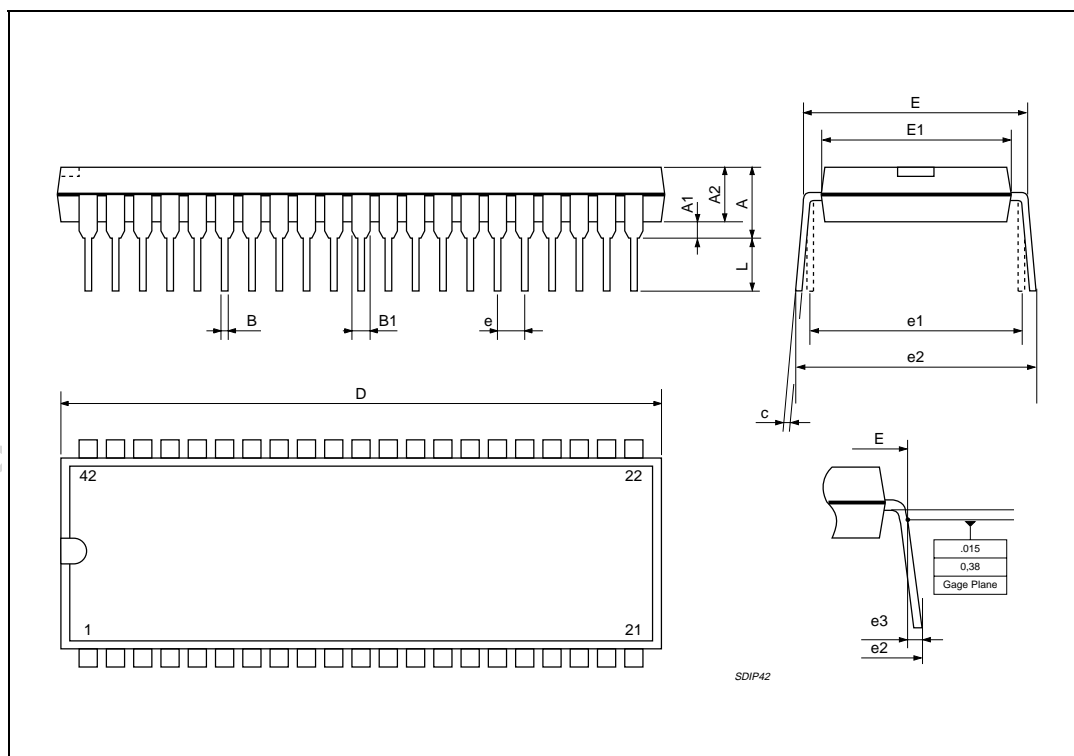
SDIP42 Mechanical Data &amp; Package Dimensions
